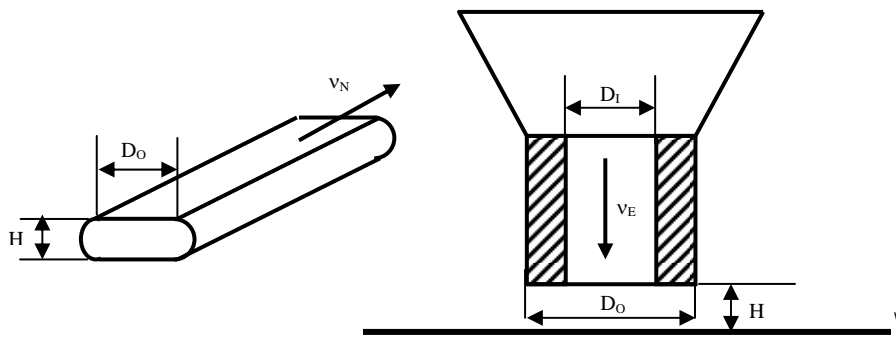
Schematic drawings showing the dimensions of the nozzle and slab shaped extrudate.
